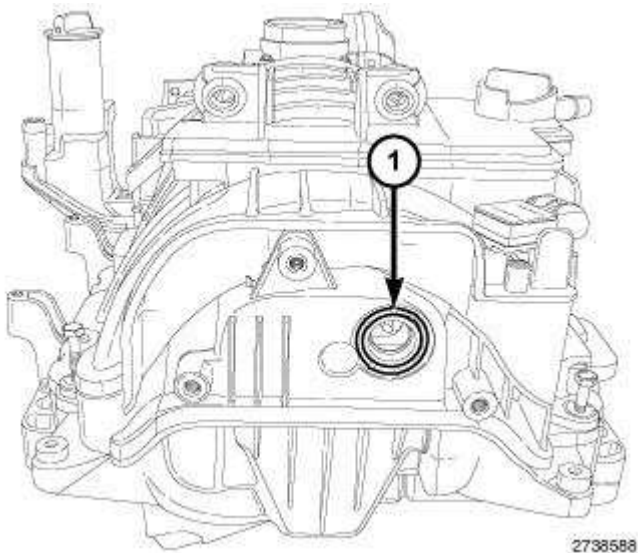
Short Runner Valve Actuator Rubber O-Ring Seal
